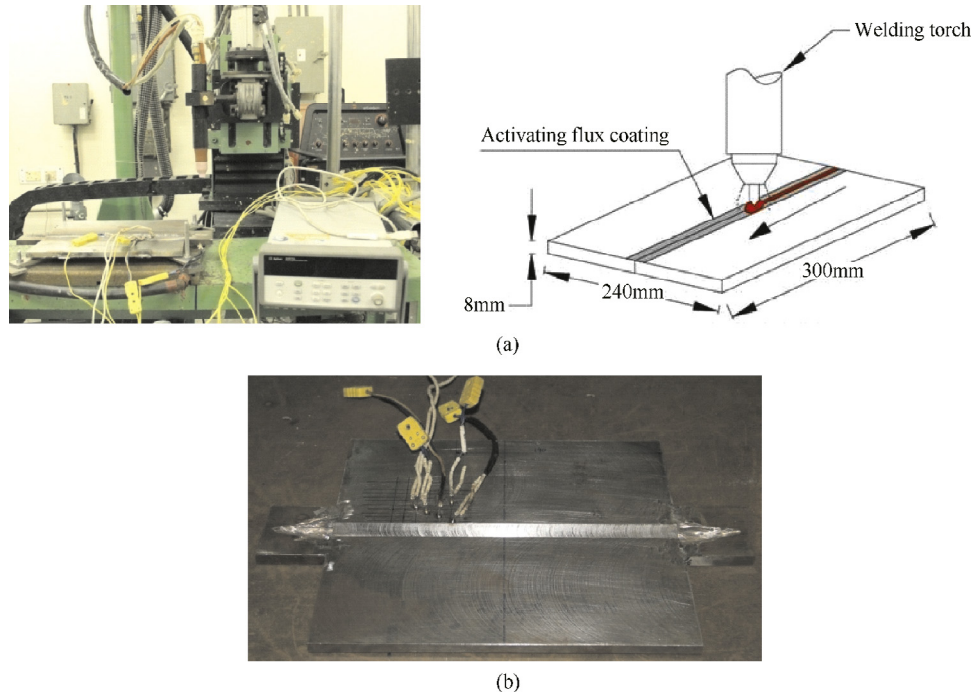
Spot welded thermocouple (a) A-GTAW joint (b) SMAW joint.
